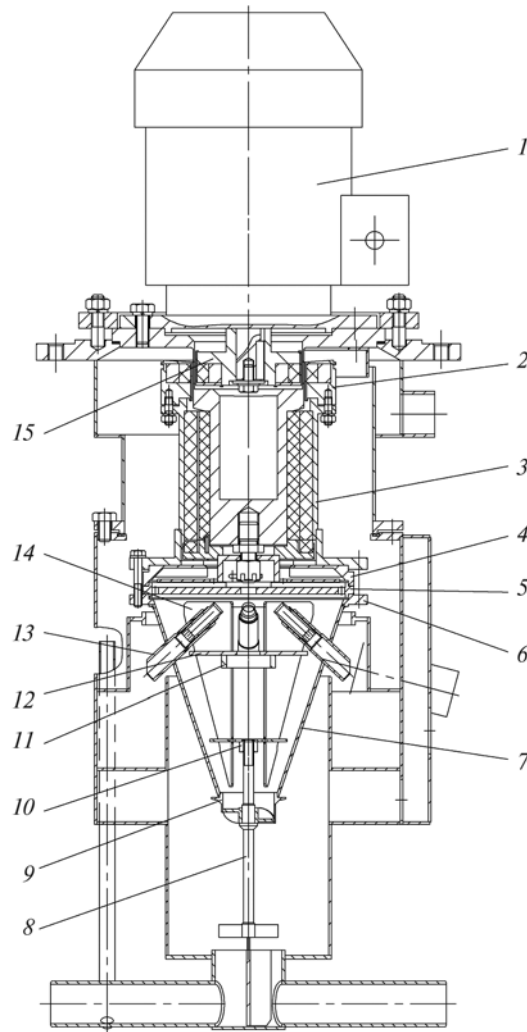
General appearance of extractor with internal driving magnetic half coupling: 1) electric motor; 2) driven magnetic half coupling; 3) column; 4) cover; 5) disk; 6) flange of housing; 7) conical shell; 8) shaft; 9) lower bushing; 10, 11) bushings; 12) partition; 13) tubes; 14) blades; 15) driving magnetic half coupling.
